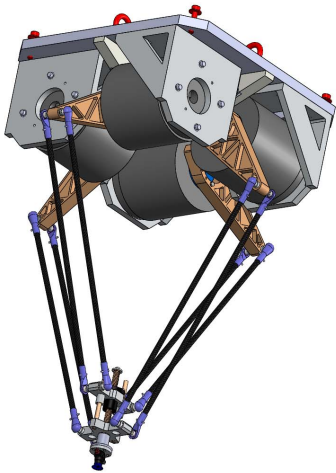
CAD view of VELOCE parallel kinematic manipulator.
